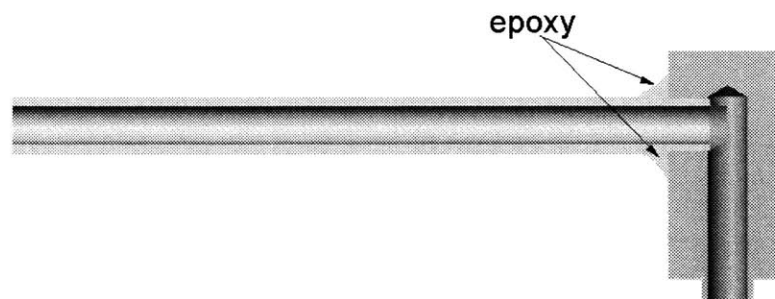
Cross-section of the large-bore fluidic fitting, showing locations of epoxy
